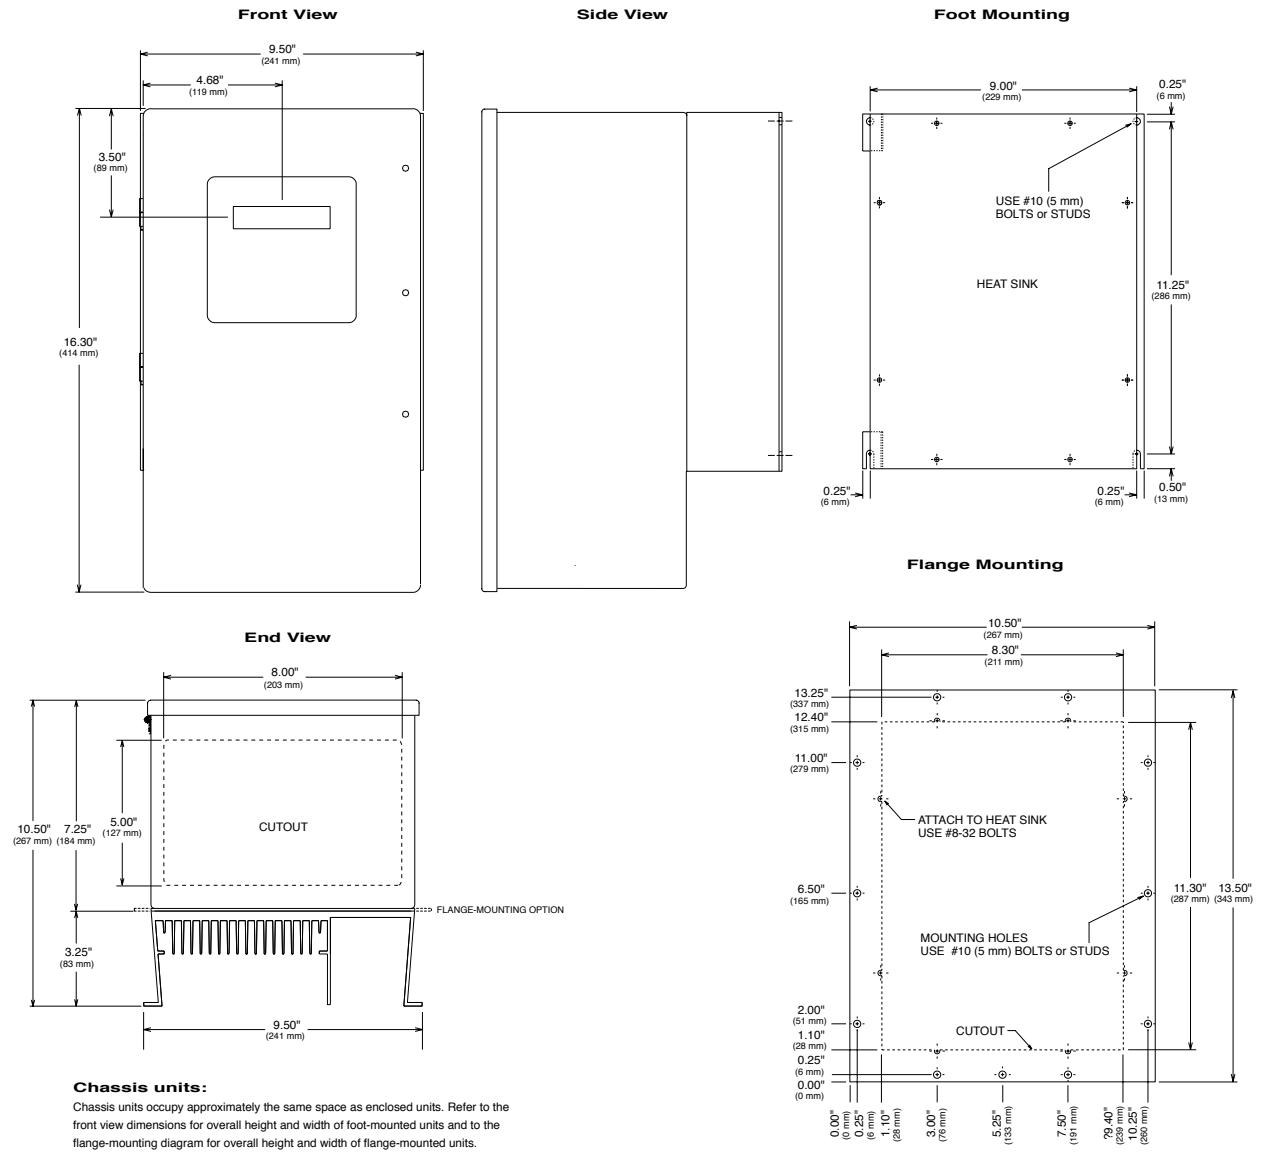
Form 13, 13N, 17, 17N, 17X, and 30 Mounting Dimensions (1100, 1105, 1110, 1120, 1130, 1200, and 1230 Drives)
